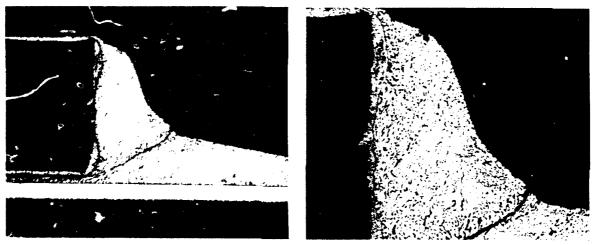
Fatigue Crack in a Leadless Solder Joint
